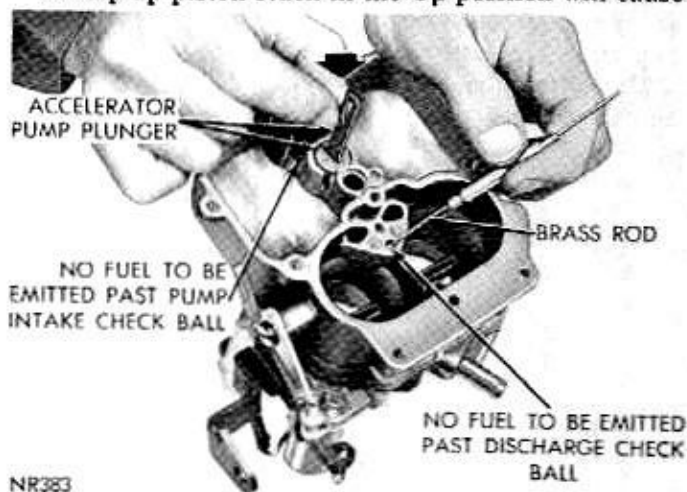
Testing Accelerator Pump Intake and Discharge Check Balls
